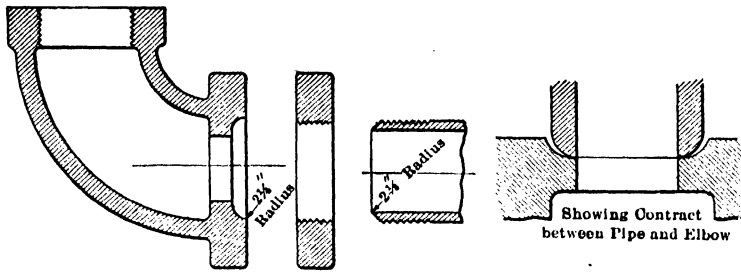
Details of an Elbow and Companion Flange of a Ball and Socket Joint
